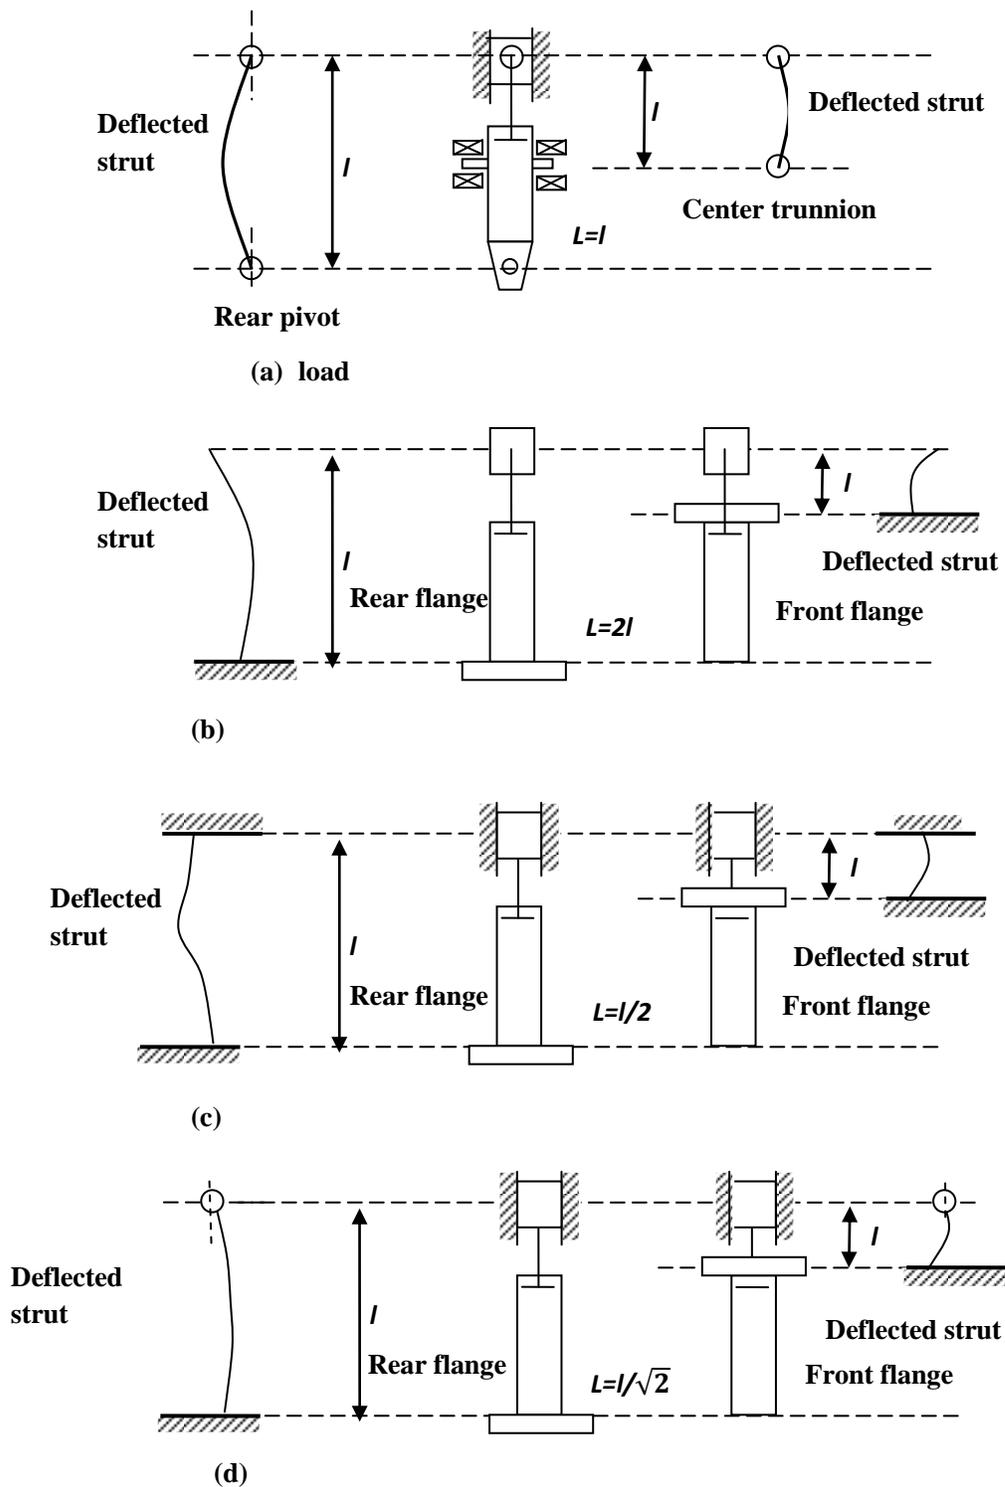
32 Relationship between the piston rod, free buckling length and method of fixing. (a) Rear pivot and center trunnion mounted, guided pivoted. (b) One end rigidly fixed, free load. (c) One end rigidly fixed, guided load. (d) One end rigidly fixed, pivoted and guided load
